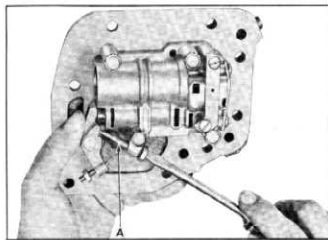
Setting (1) of Throttle Valve Inner Lever Adjustment
